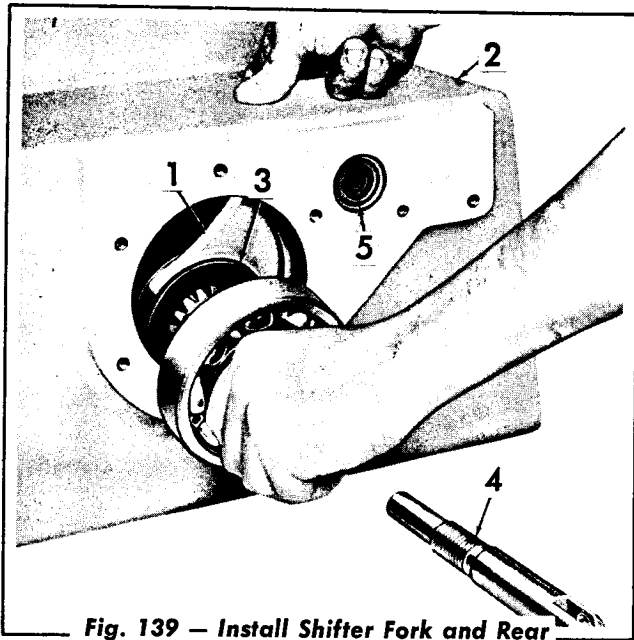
Install Shifter Fork and Rear Output Shaft
